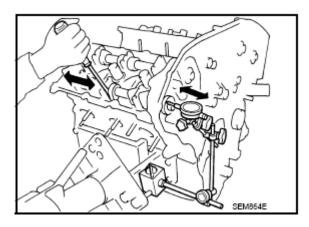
Measuring Camshaft End Play Using Dial Indicator Courtesy of NISSAN NORTH AMERICA, INC.
